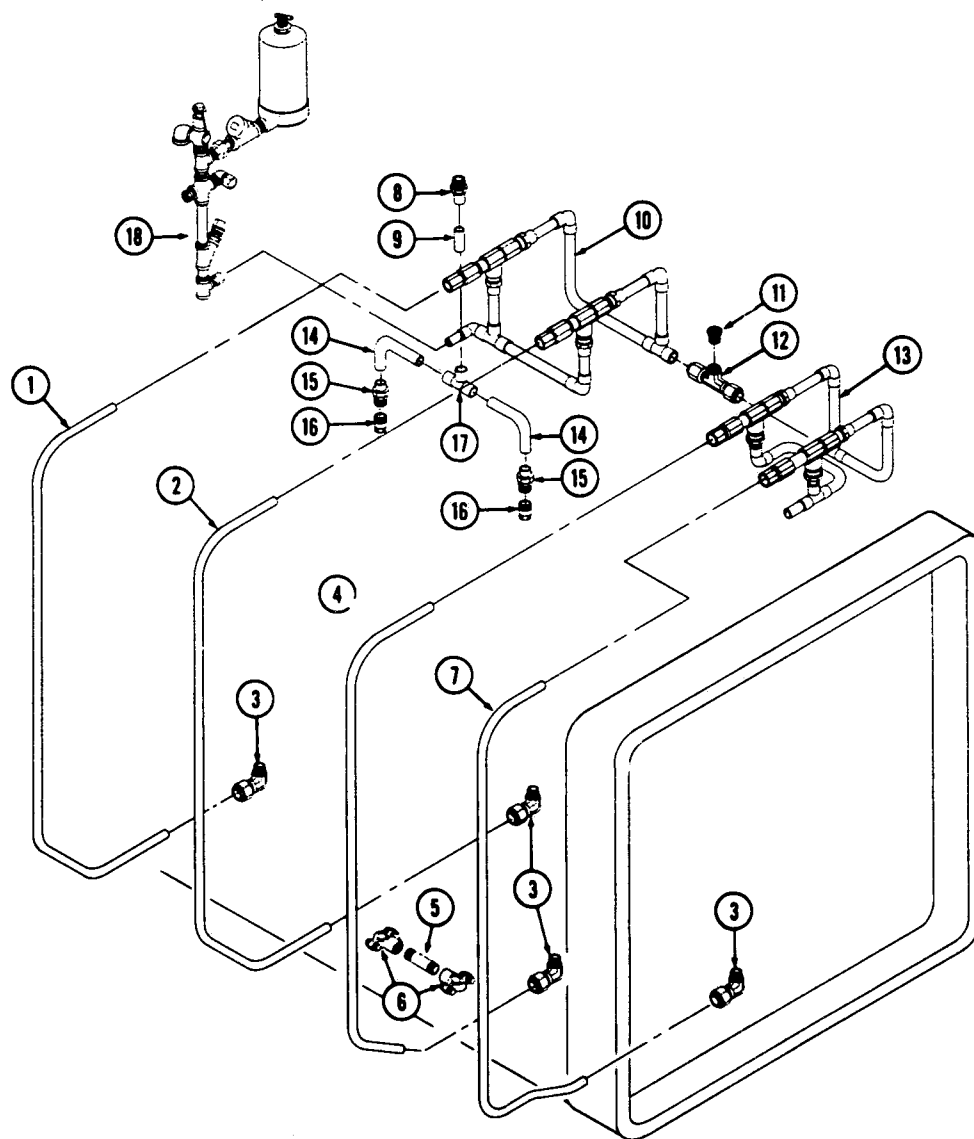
EJECTOR ASSEMBLIES, Complete
